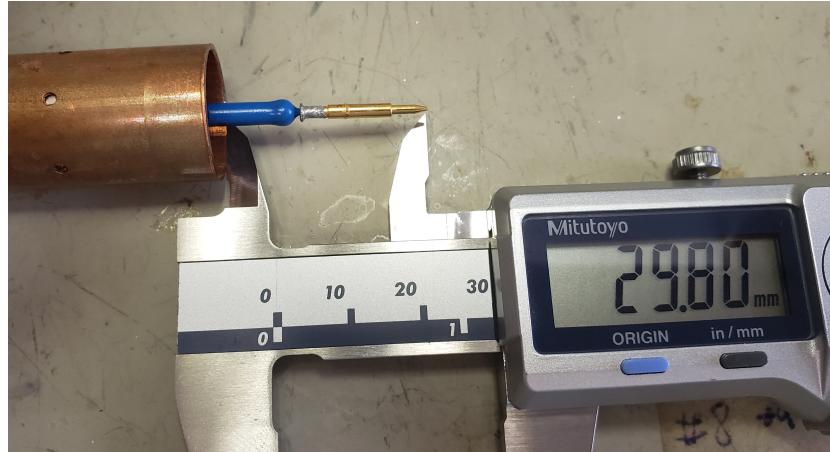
Distance of pin from end of tube measured with calipers. The position of the pin should be ensured using the jig. The rotation of the capacitors must be such that they can be soldered to the tube through the holes in tube, but the exact insertion of the capacitors in the tube isn't important.
